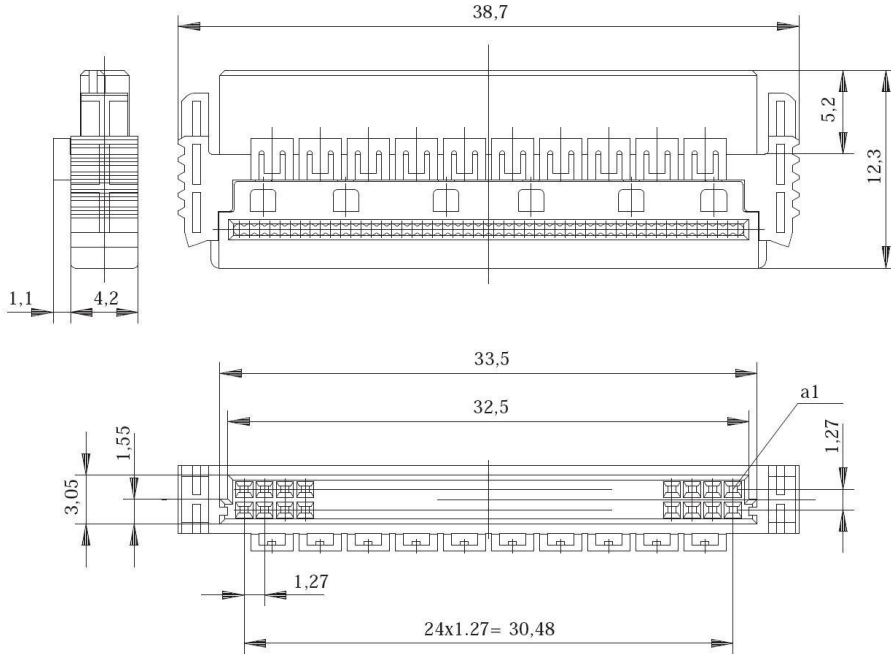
coolteq.h™ Modulator Envelope, Control & Monitor Interface, Ribbon Cable Connector Mechanical Drawings.
